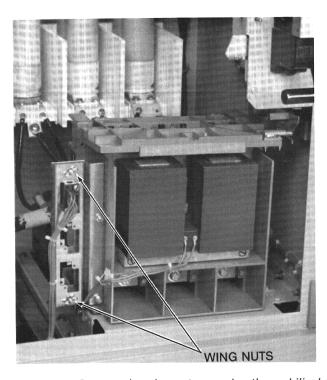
Remove the wing nuts securing the umbilical cord on the left side of the contactor.
